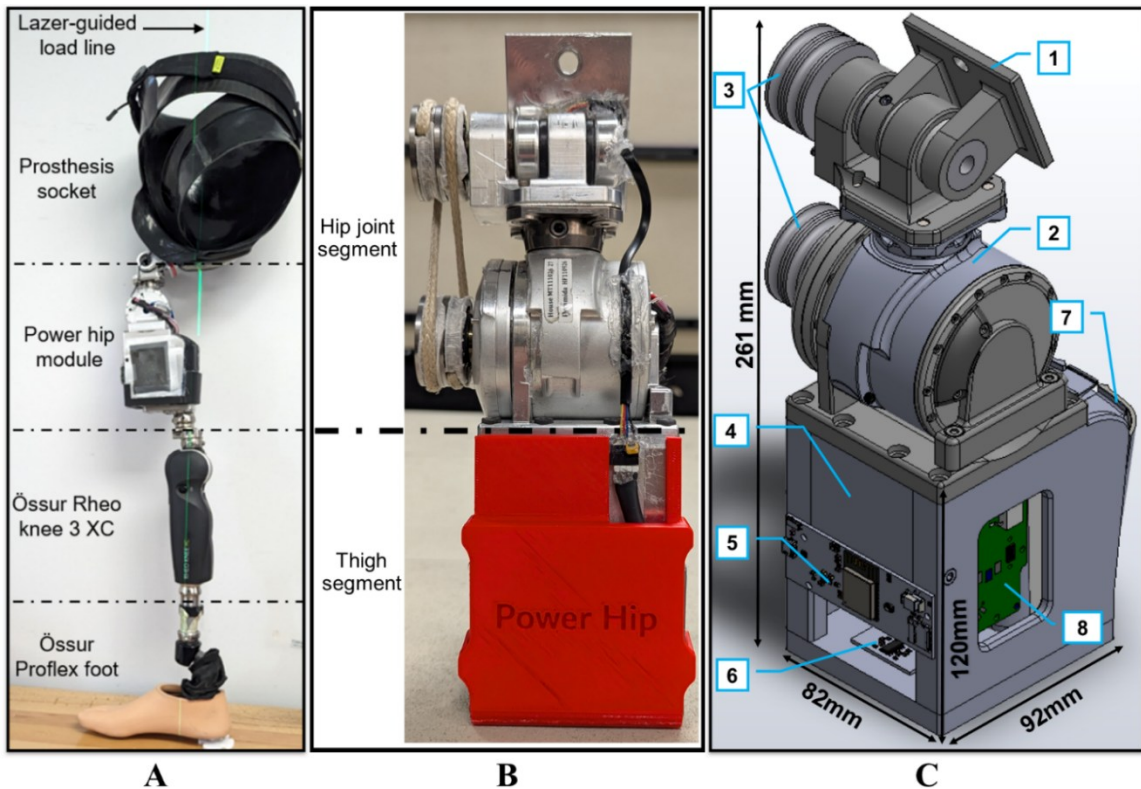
Fully assembled Power Hip HKAF prototype (A), closeup frontal view of Power Hip module (B), and computer-aided design (CAD) of the Power Hip module (C). 1: Interface plate between Power Hip and prosthetic socket lamination plate, 2: DC motor, 3: Motor torque transfer pulleys, 4: Thigh chassis frame, 5: Sensor signal processing and active control electronics, 6: Load cells, 7: Battery, 8: Motor driver electronics.
